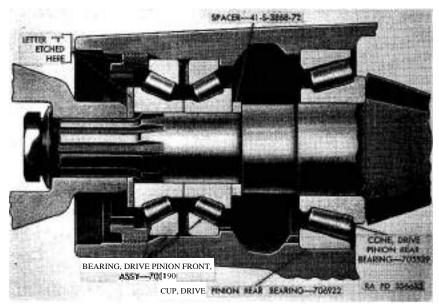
Location of spacer for checking drive pinion front bearing assembly.
